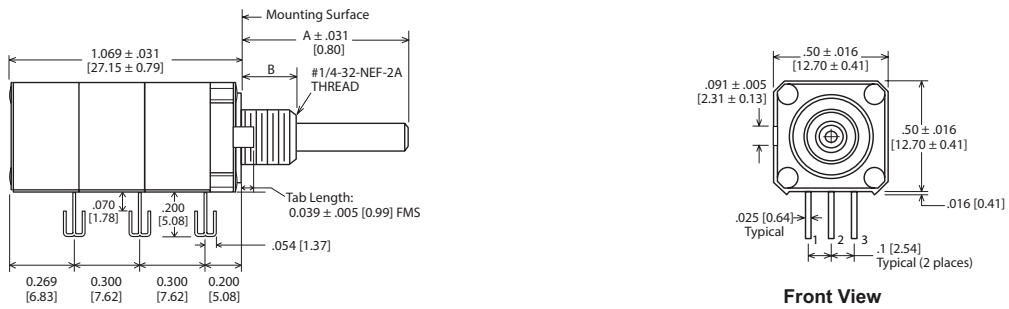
SHA-1A: Single Potentiometer or RS, Solder Hooks, 1/4" Dia. Bushing
